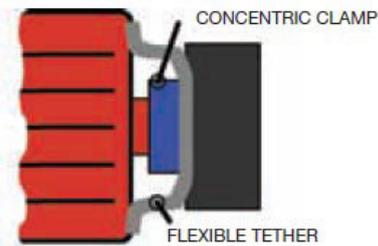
A hub-shaft encoder can also be directly mounted on the motor or driven shaft
